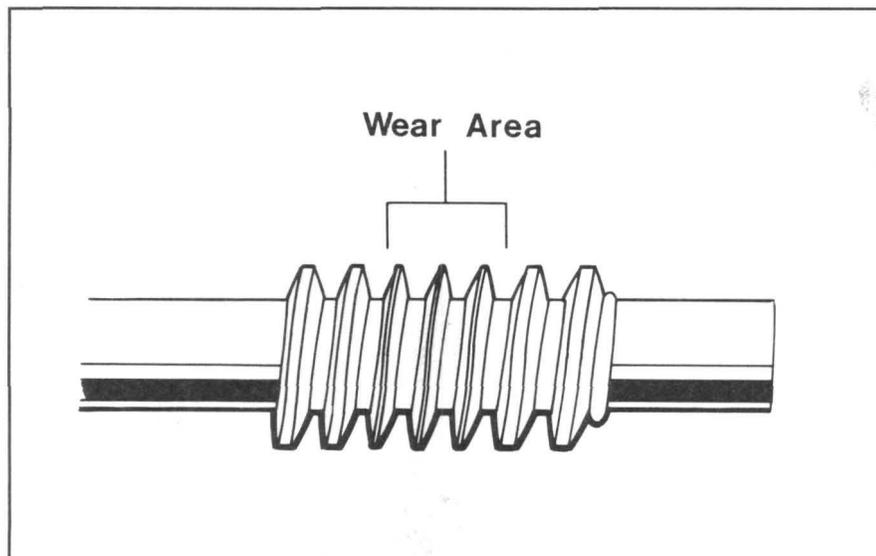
Inspecting the drive shaft worm. If worm is worn more than 50% in wear area shown above, discard the drive shaft.
